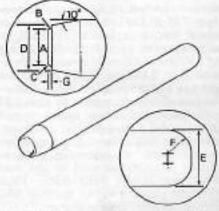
A swage tool must be made from silver steel with approximately 1 percent carbon to dimensions shown. Heat freat tool by heating until bright red and cooling in oil. Polish spigot end and heat until steel is purple color. Let cool naturally by air.
